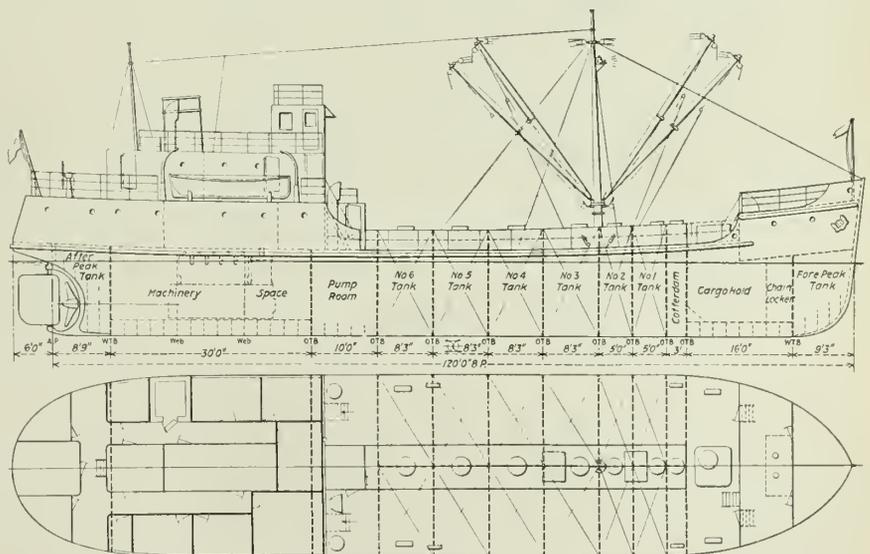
"Beceelite," Elevation and Deck Plan Showing Cargo Tank Layout.
